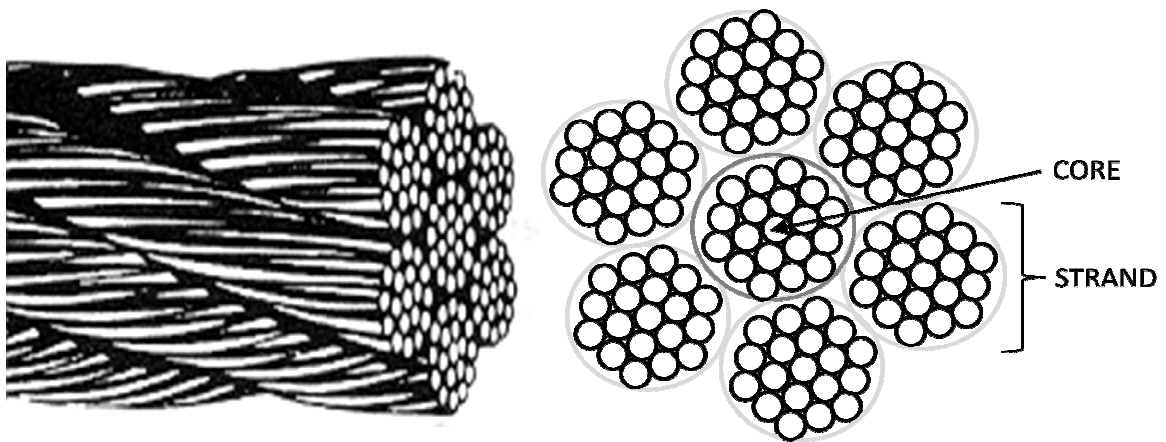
7X19 cable side view and end view; side view reprinted with permission from VER Sales.
